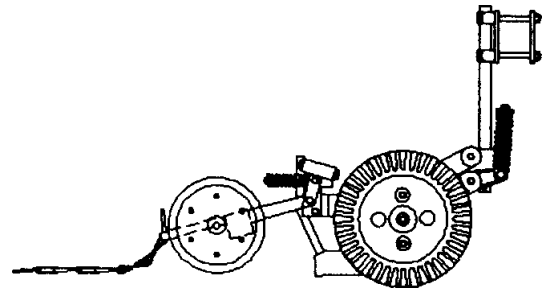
Yetter seeder coulters showing plastic depth gauge wheel and drag chain attachment.
